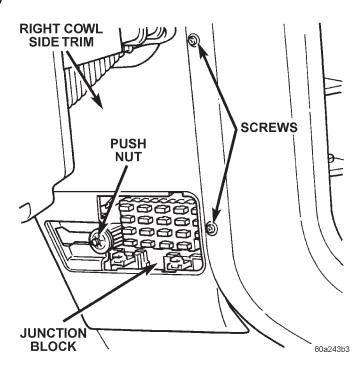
Right Cowl Side Trim Panel Remove/Install
